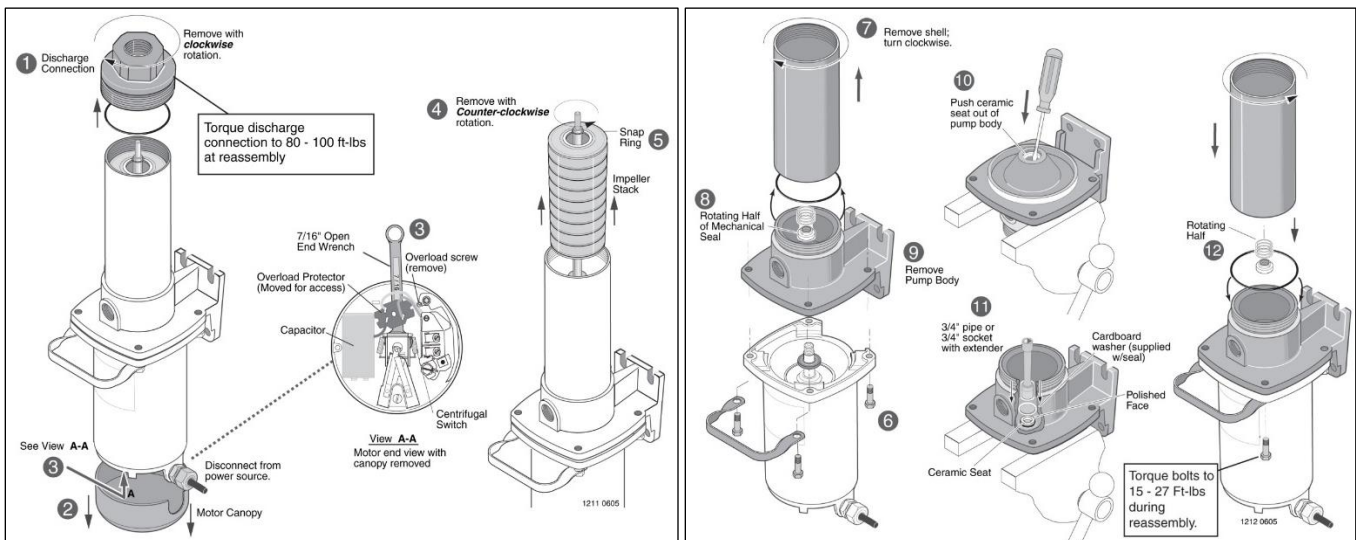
Impeller Stack and Mechanical Seal Changeout
